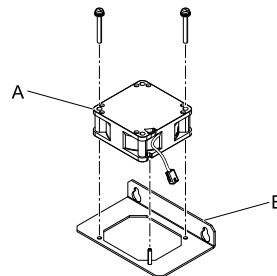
Remove the Circuit Board Cooling Fan Units
